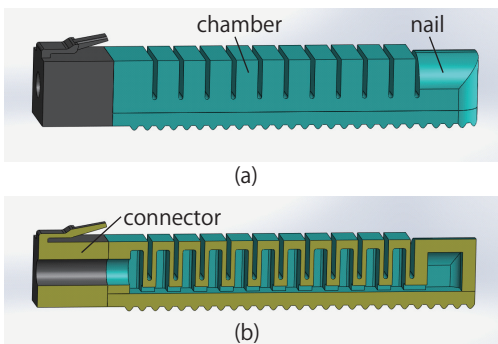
The finger design in (a) an isometric view and (b) a section view.
